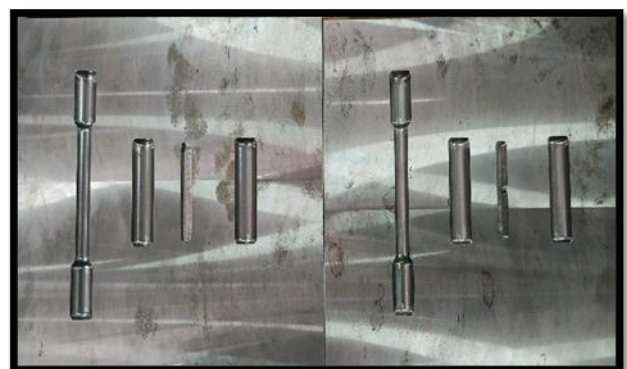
Powder Metallurgy Setup For Preparation of Specimens As Per ASTM Standards By Using Mould.
